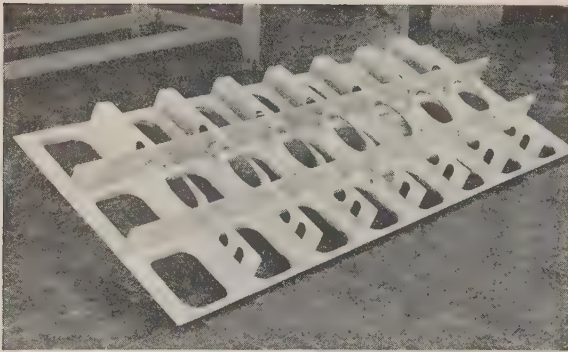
WELDED SUBASSEMBLY WITH ALL WELDING READILY ACCESSIBLE
